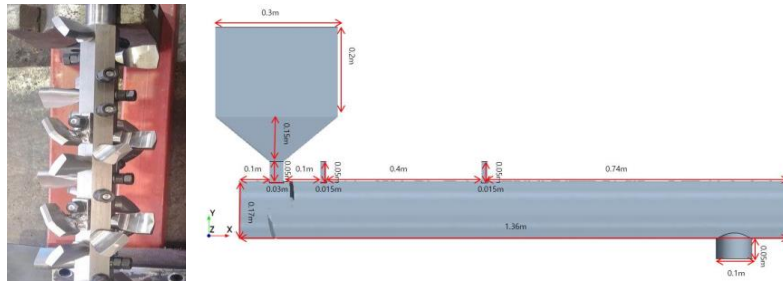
Paddle Impeller shaft in mixer Figure 2. Geometry and dimensions of mixer
